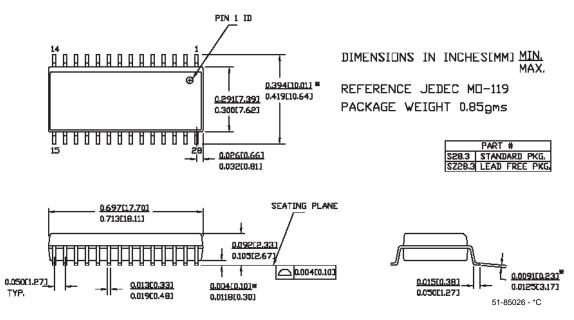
28-Lead (300-Mil) Molded SOIC
